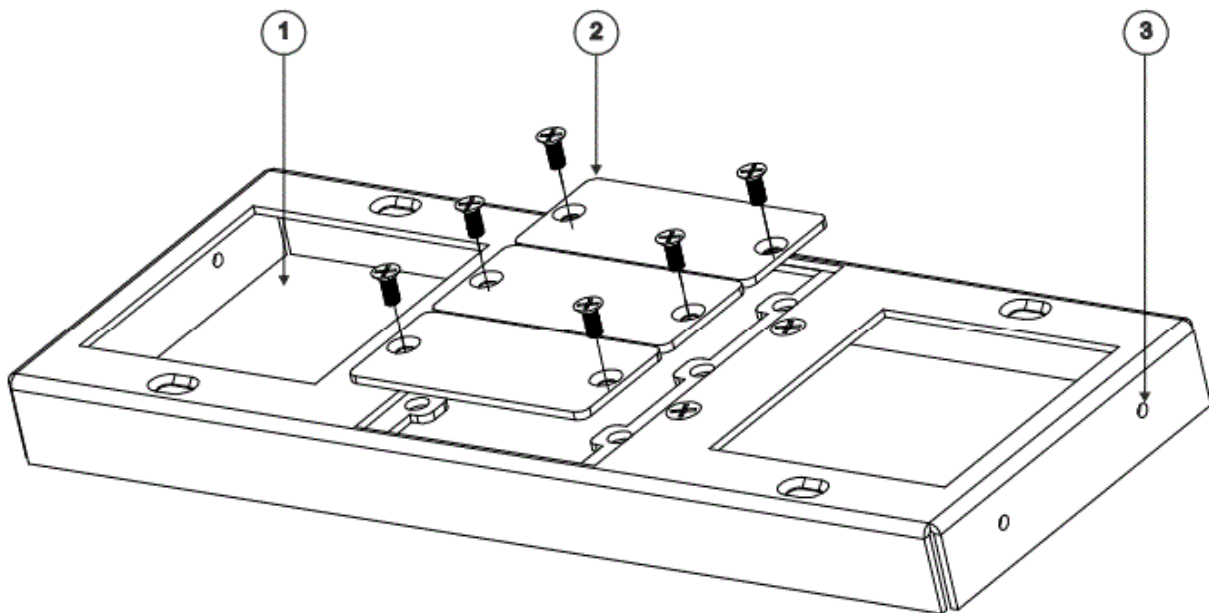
TBUS-6xl Inner Frame (P/N: 80-004499)
